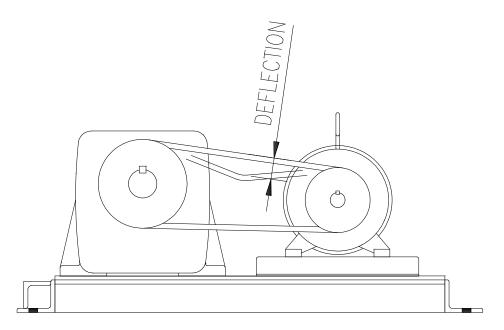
Drive assembly showing measurement of v-belt deflection. (Guards removed for illustration only.)
